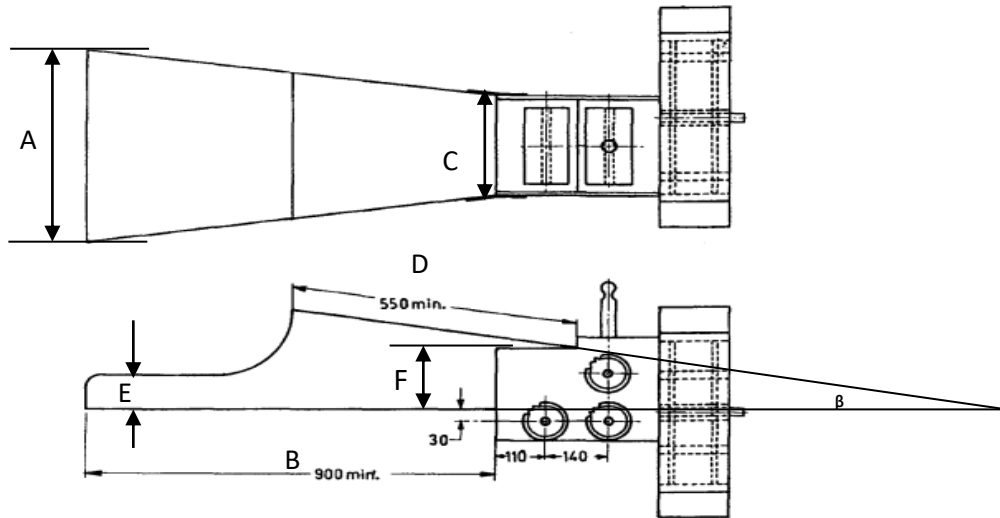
Safe feeding chute used on chaff-cutter type thresher (IS: 9020-2002)
